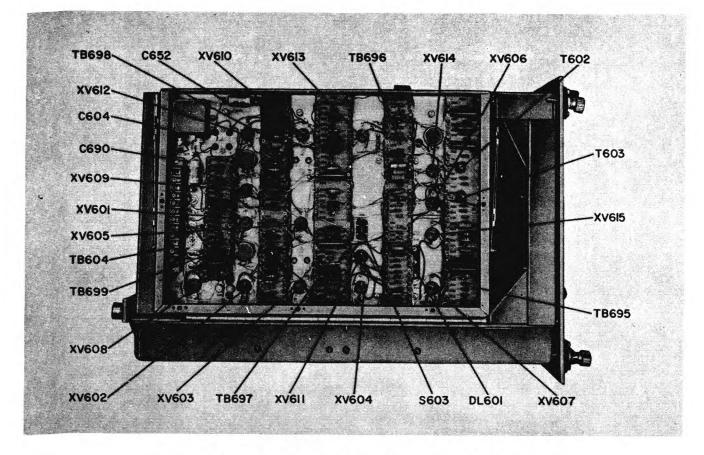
Coder-Indicator KY-382/GRN-9D, Left Side View
